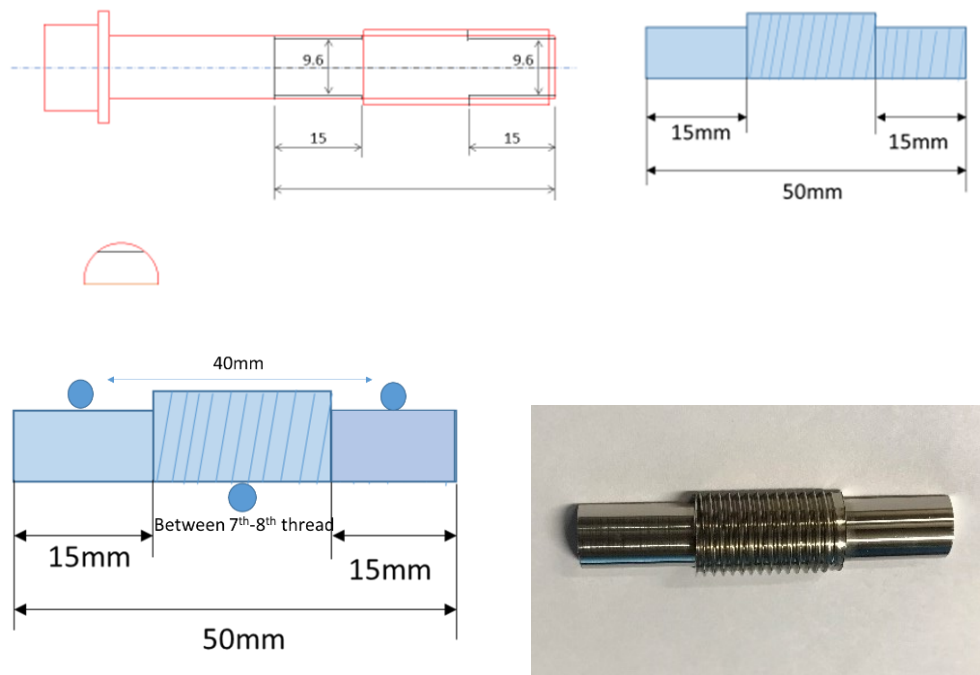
Schematic and photo of half-cut large bolts for three-point bending fatigue tests
